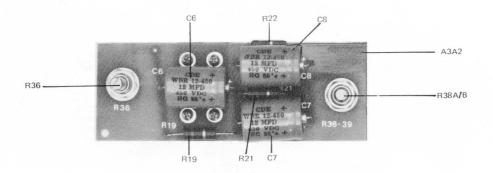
Pushbutton Board Assembly A3, Component Layout
